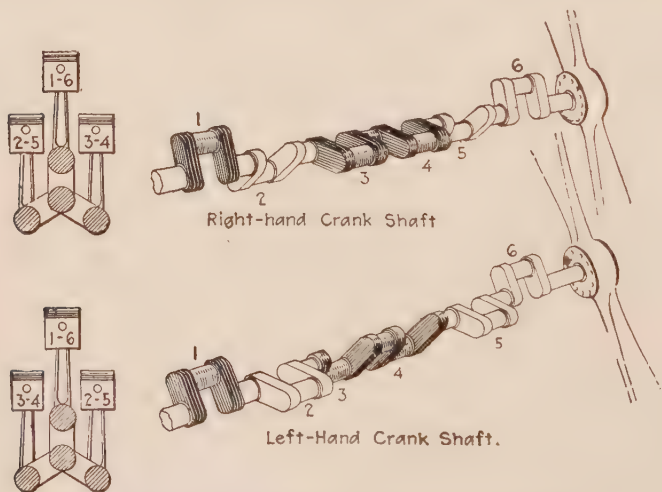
Right- and left-hand six-cylinder crankshaft.
